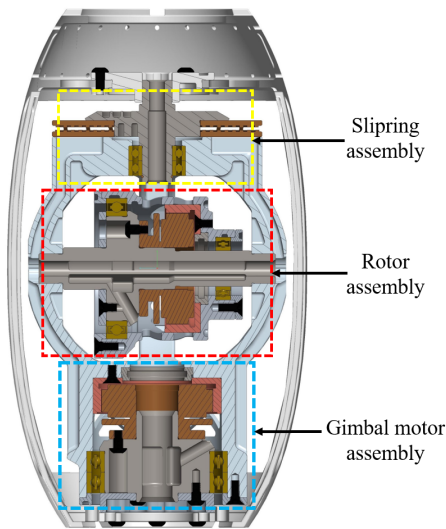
Cross sectional view of the device depicting the principal components of the assembly
